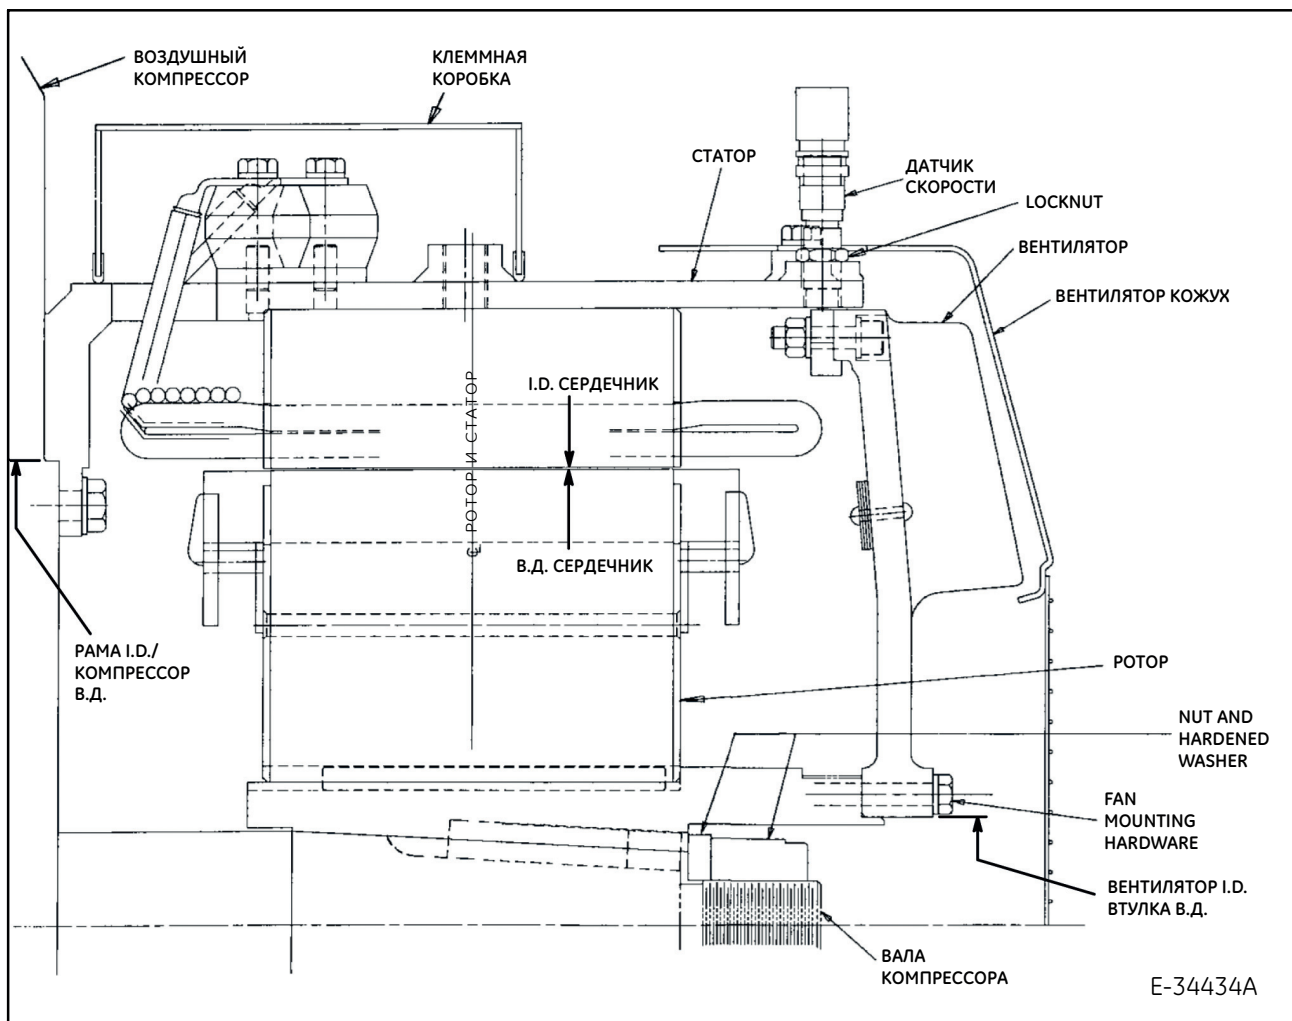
5GYA28 Air Compressor Motor - Longitudinal Cross Section
